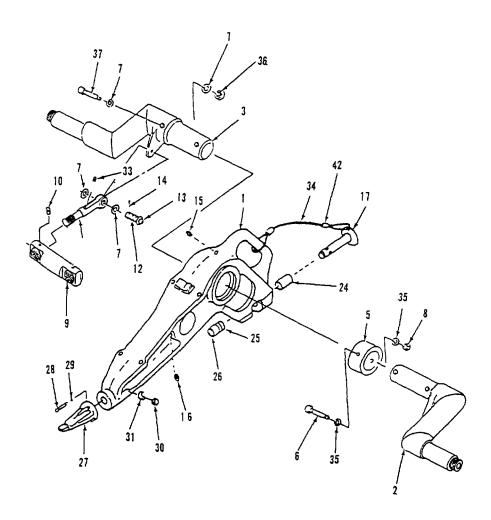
Cradle Assembly, Model 214-706-104-101
